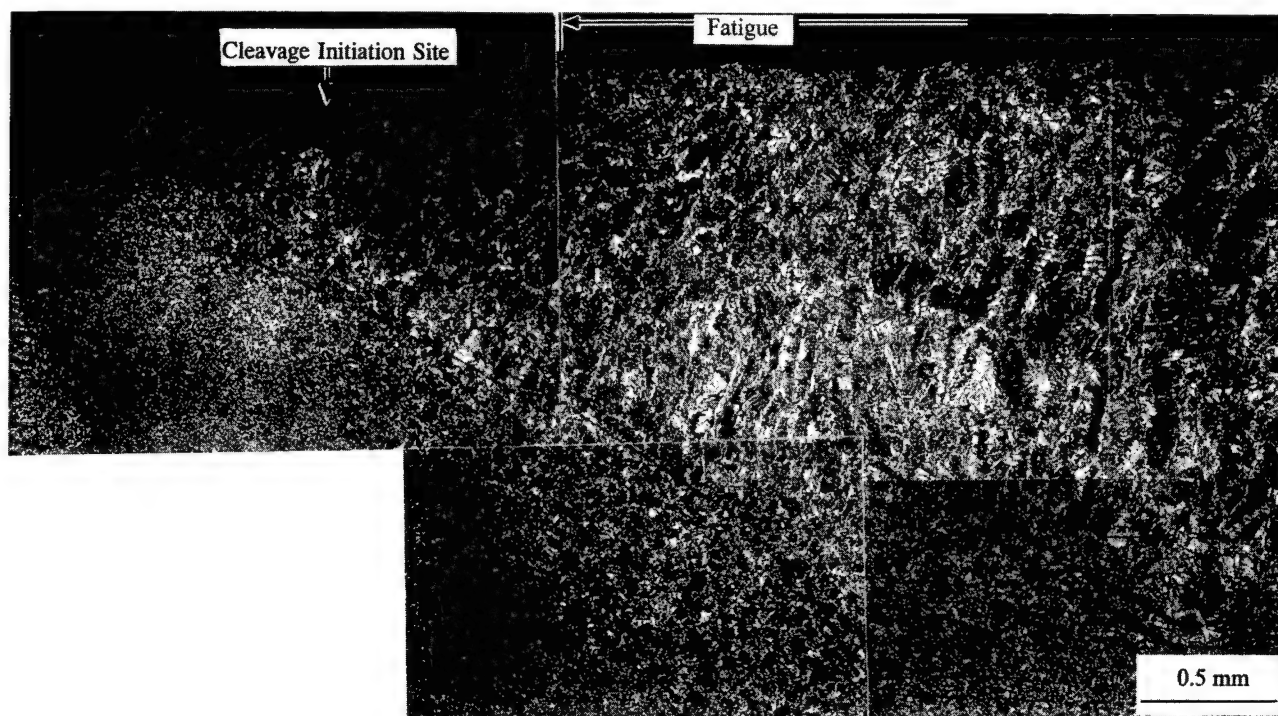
An optical micrograph of specimen GXX 62 showing the location of the fatigue precrack tip and the CIS with respect to the welding bead structure.
